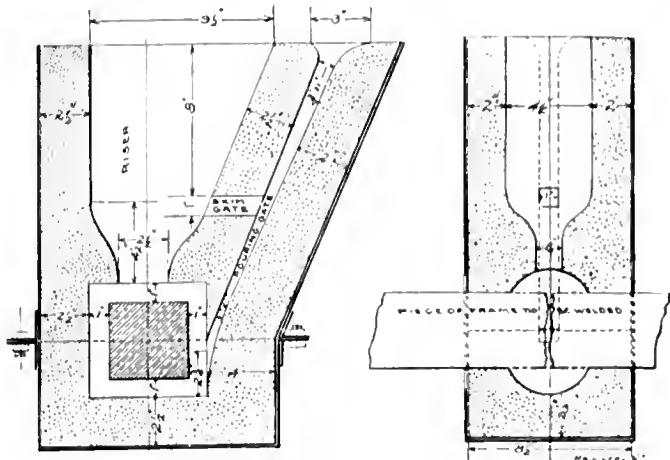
Section through Mold which is Built around the Part to be Repaired
